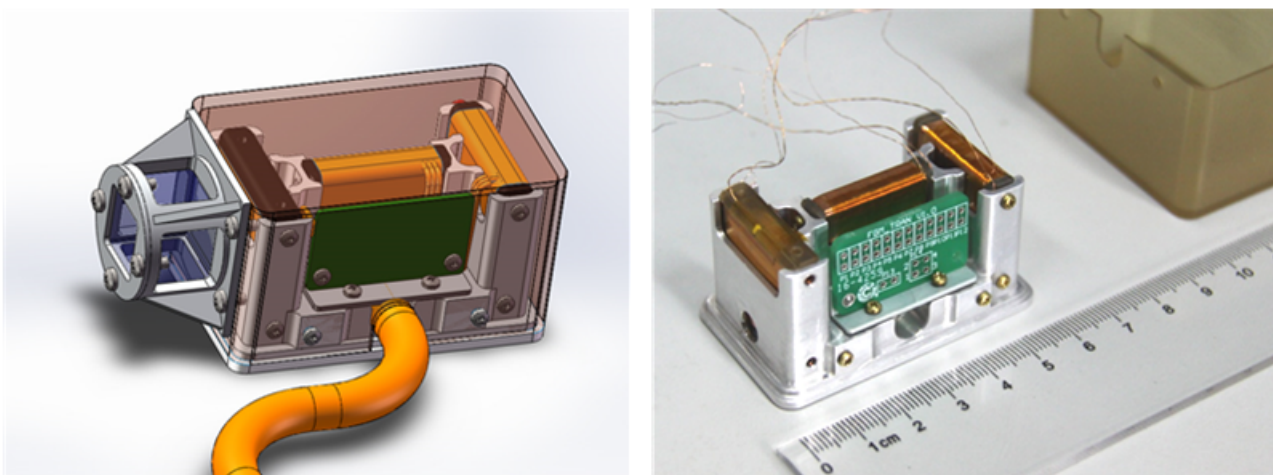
The MAG sensor head. Left panel: 3D rendition from CAD model. Right panel: Finished engineering model.
